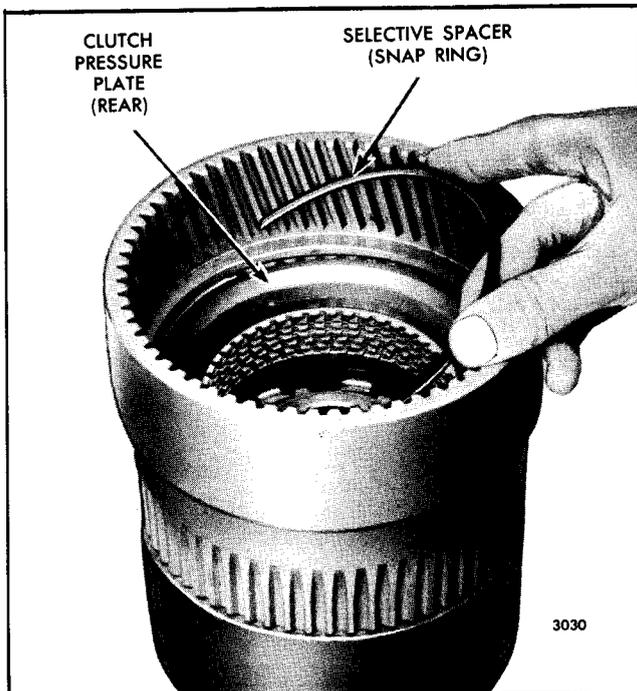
Installing Forward Clutch Selective Spacer (Snap Ring) in Ring Gear
